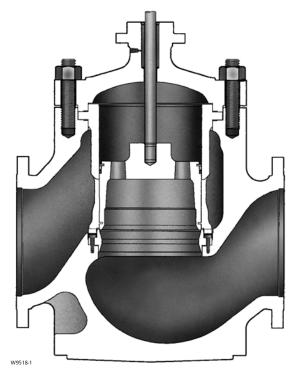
Fisher EUT / EWT Valve with PEEK Anti-Extrusion Rings
